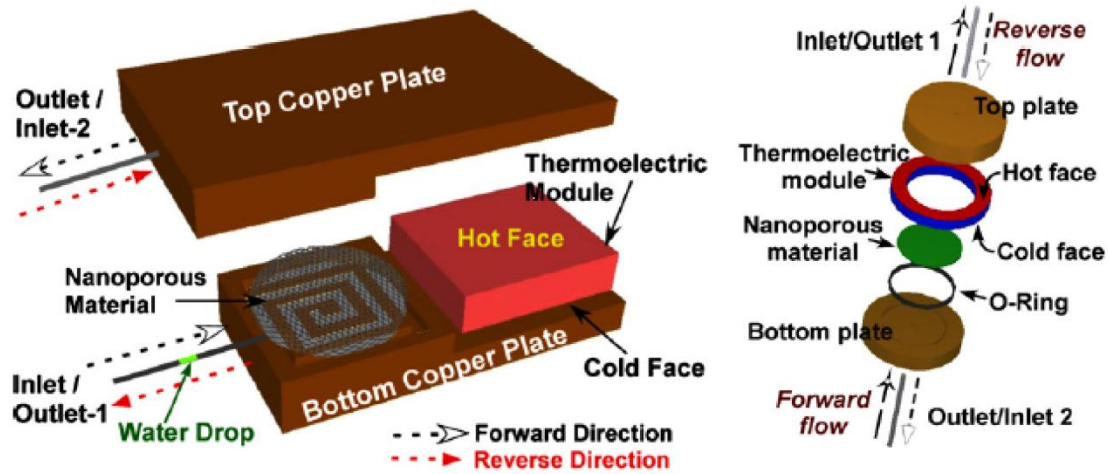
Exploded view of the lateral and radial designs. (Left) Lateral design. (Right) radial design [22].
